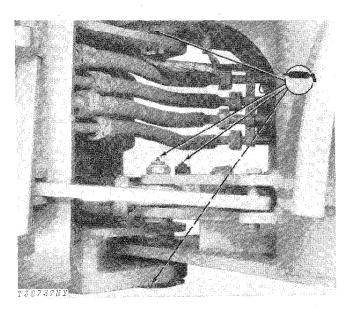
Steering Cylinder Front Pivot Pins (2 Points) and Frame Hinge Pivots (2 Points)
